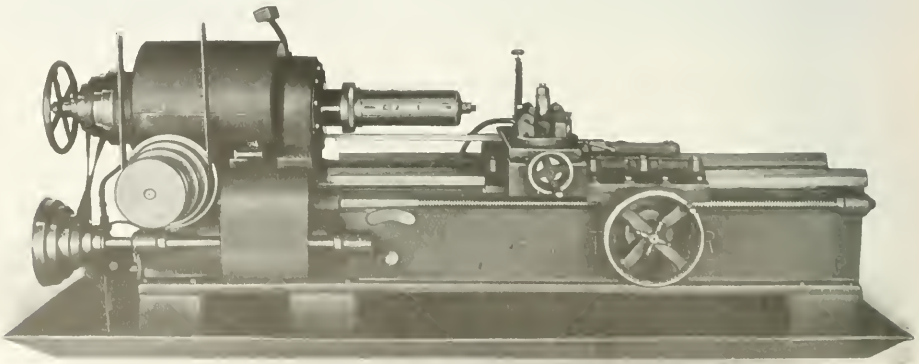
Front View of Hart-Parr Shell Turning Lathe; note Mandrel carried by Spindle
